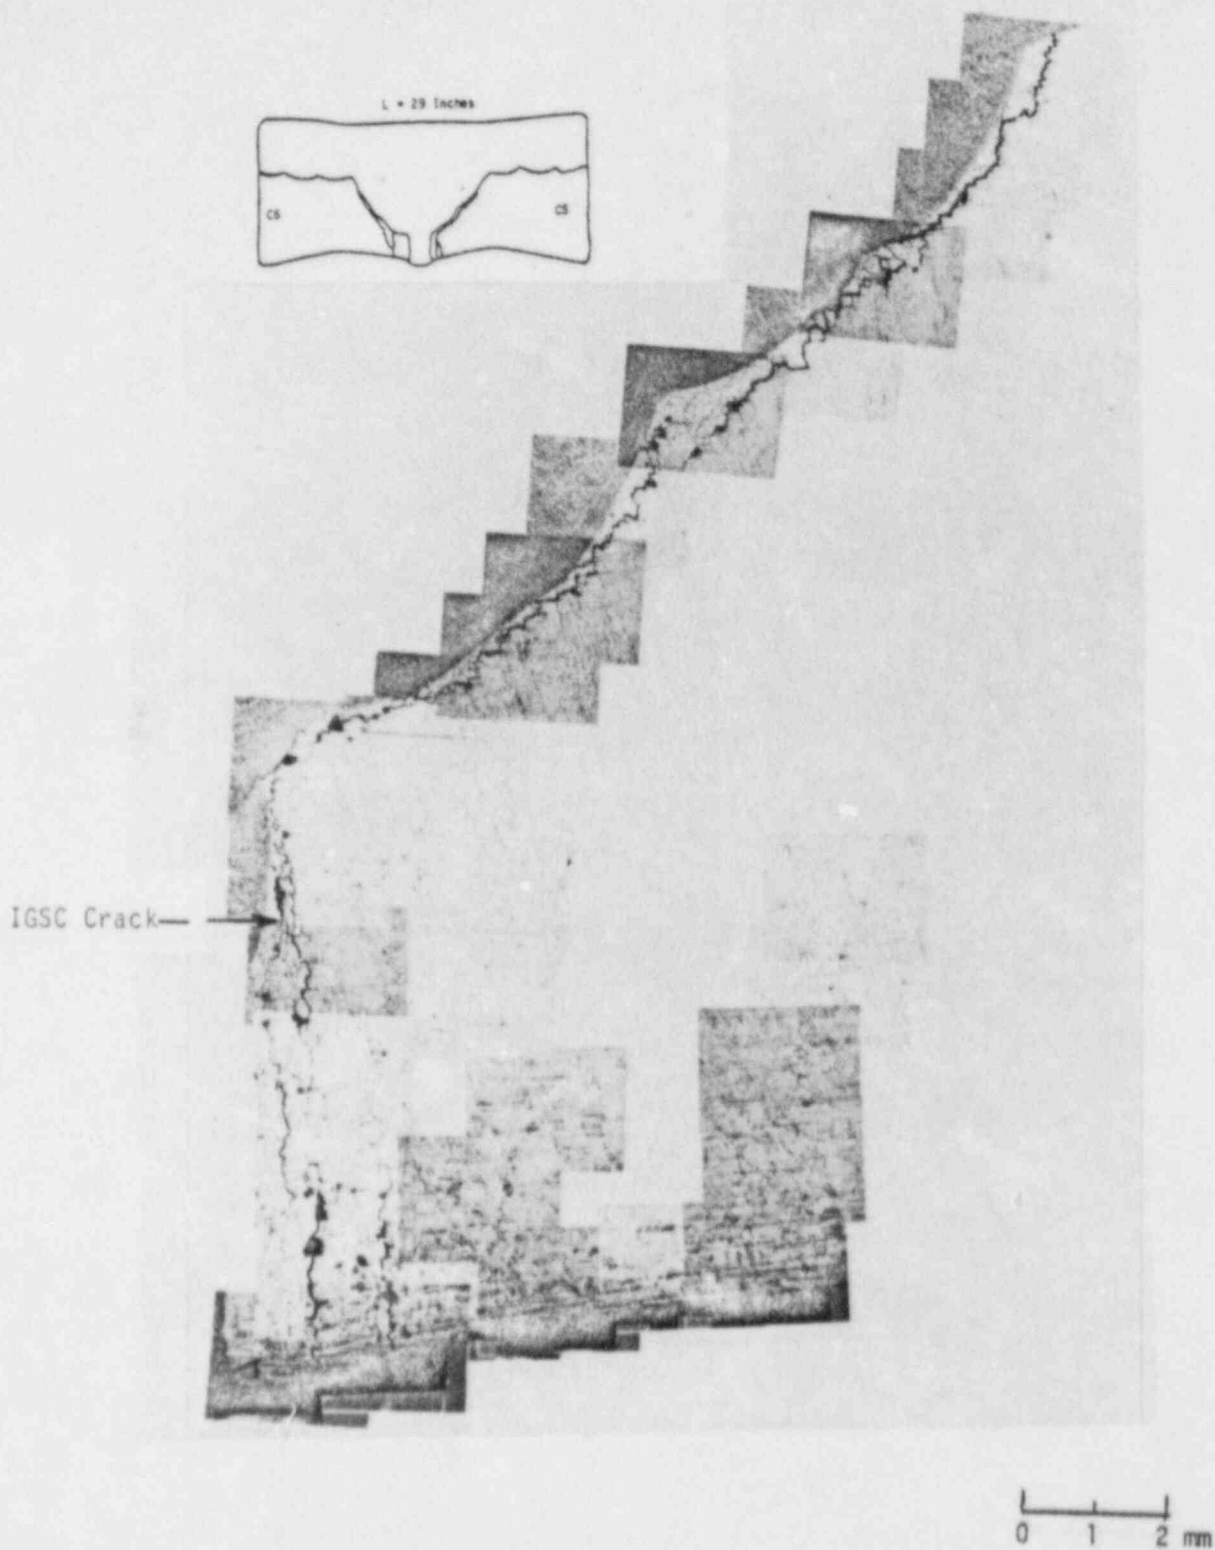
Cross Section of C5 Side of NC5-C6 at 26.5 Inches, Indicating a Through-Wall Depth of 96% of the Original Pipe Wall. (Crack Depth = 0.757 Inch; Total Remaining Wall = 0.365 Inch.) Source: Becker et al., EPRI NDE Center, April 1985.
